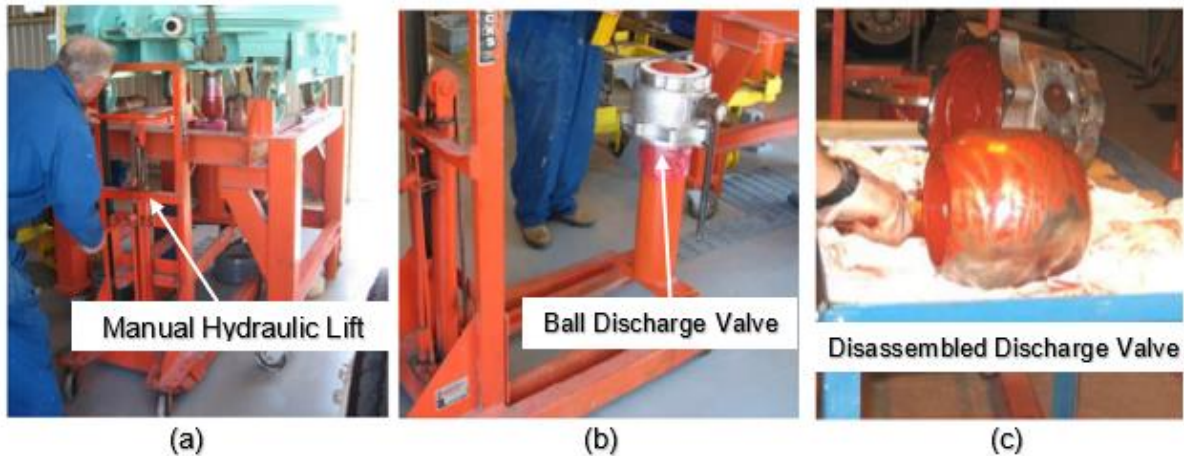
Removal of ball discharge valve (a) Manual hydraulic lift used to lift the mixing bowl (b) Ball discharge valve lifted onto the hydraulic lift (c) Disassembled ball discharge valve for cleaning [2]
